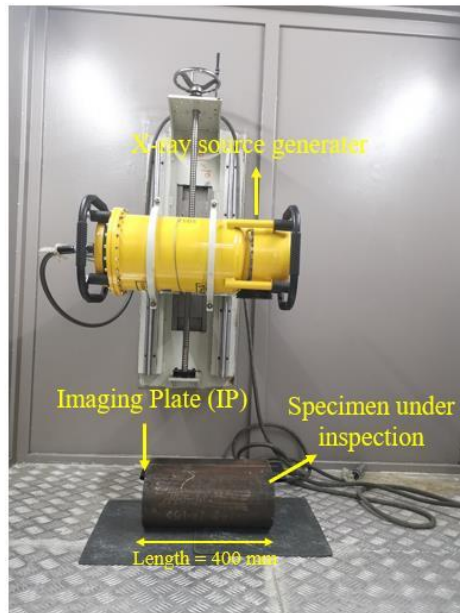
Schematic view of the X-ray inspection method for welding inspection
